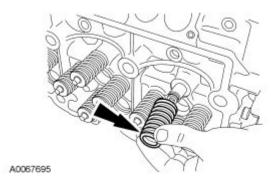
Removing Valve Spring Courtesy of FORD MOTOR CO.
